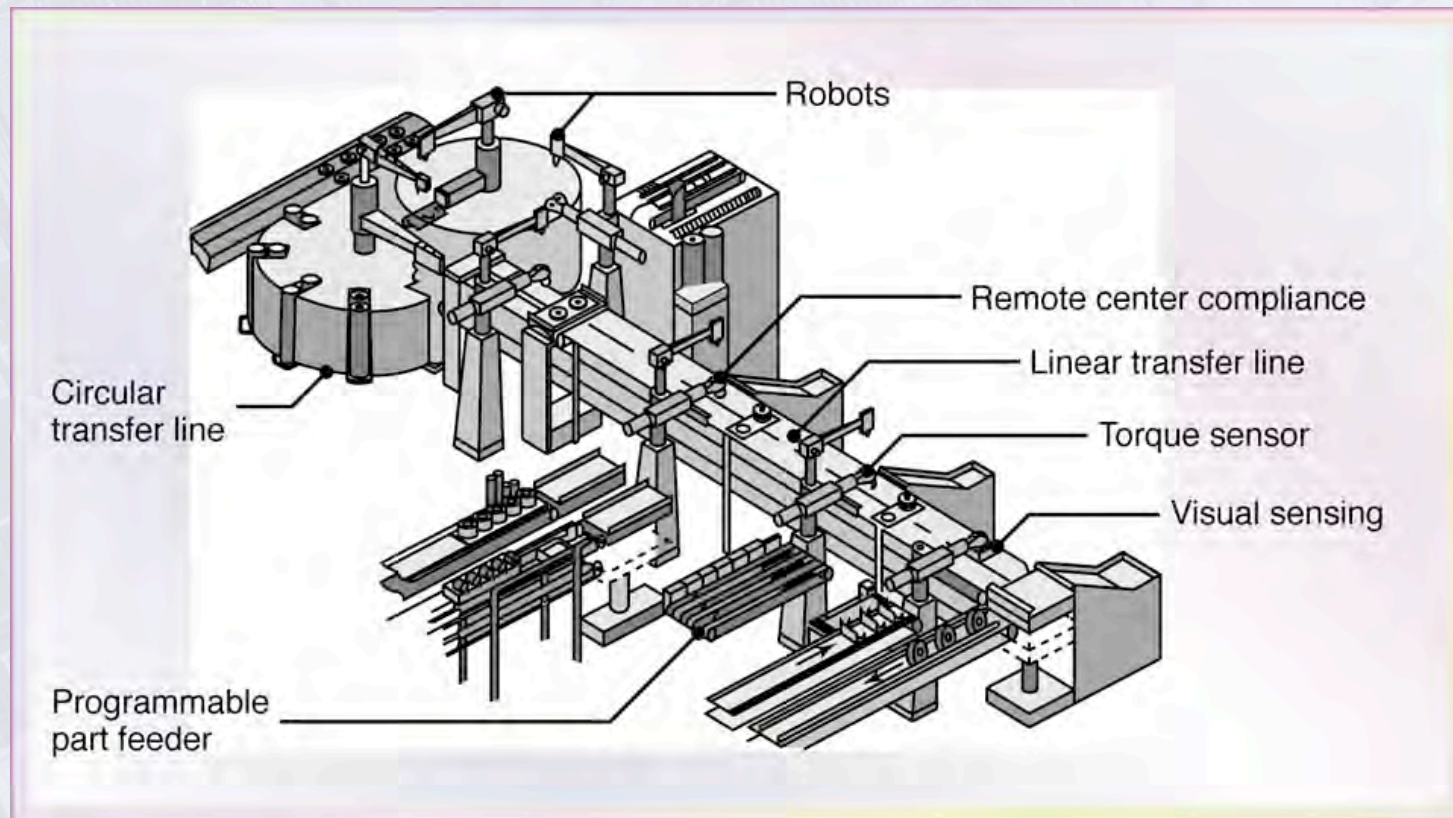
Automated assembly operations using industrial robots and circular and linear transfer lines.
